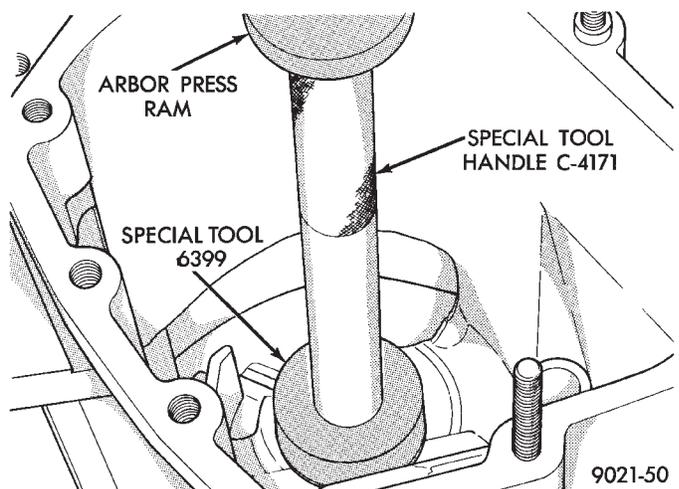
Remove Intermediate Shaft Front Bearing
